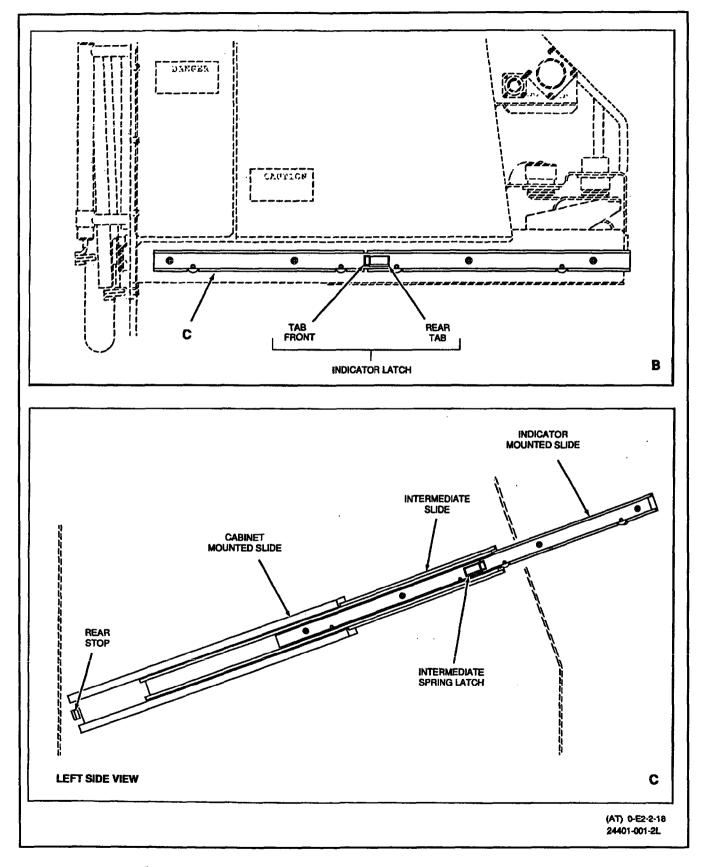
Removal and Installation of Azimuth-Range Indicator IP-1625/APQ-179 (Sheet 2)
